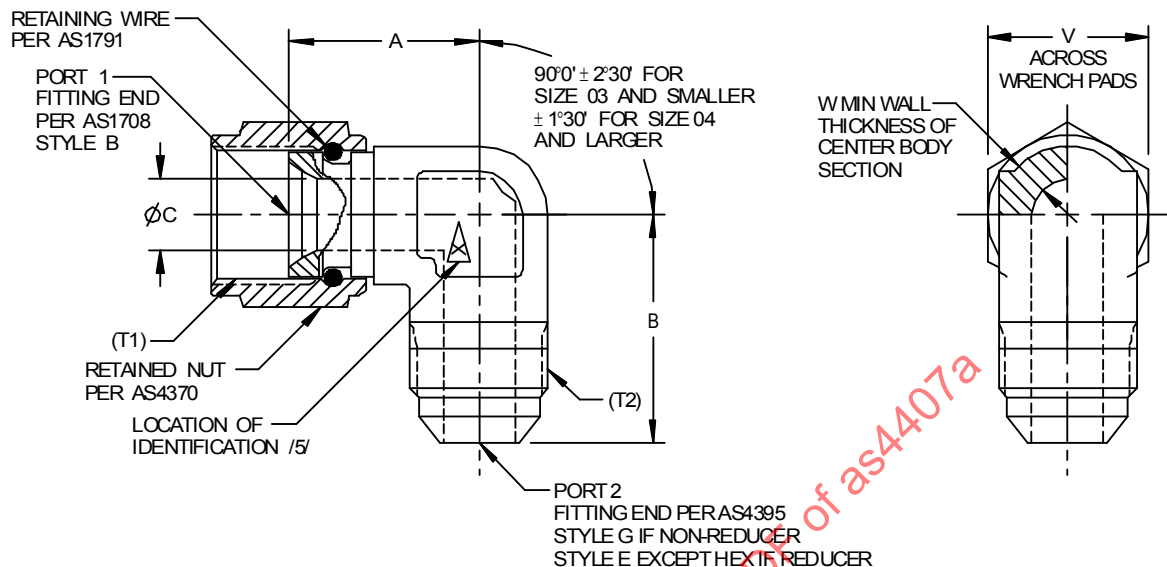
FITTING ASSEMBLY, ELBOW 90°
